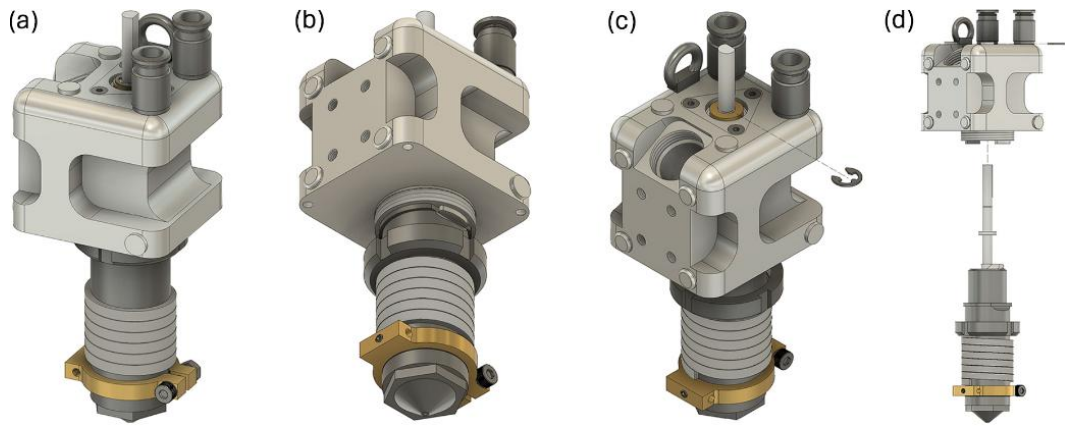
Extruder (a), loosening of the barrel lock nut (b), removal of e-clip (c) and un-assembly of barrel and screw (d).
